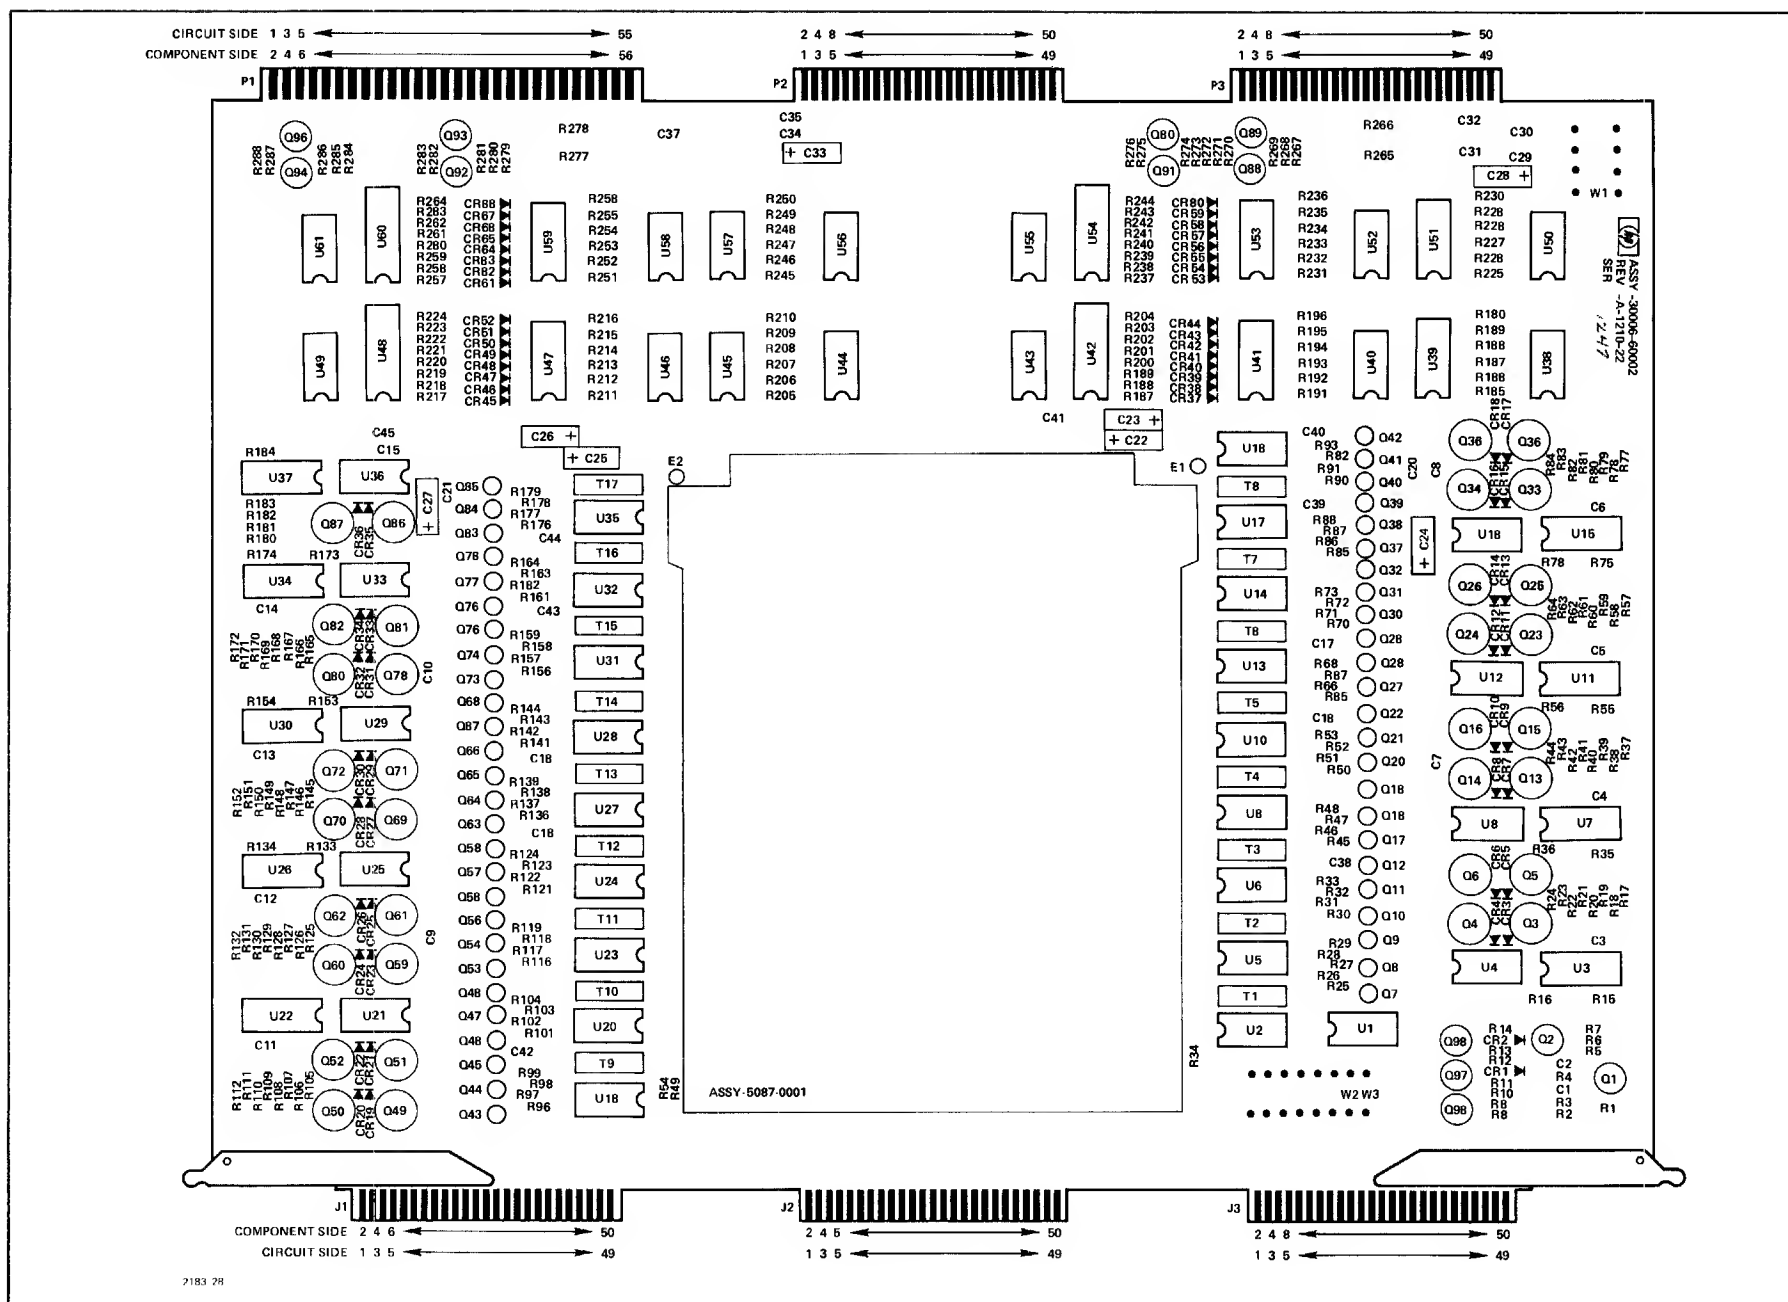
Memory Drive and Sense PCA, Parts Location Diagram
